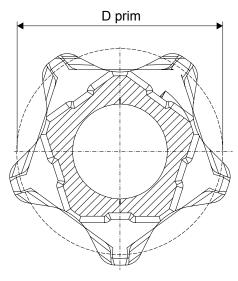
Dimensions of the chain sprocket; SL05-SL10, SR25
